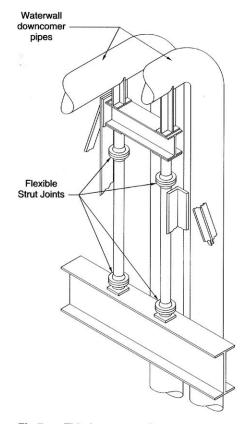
This is a supporting arrangement for boiler water wall downcomer pipes in a large steam generating station. Two Flexible Strut Joints are used as compression members. They eliminate the need for overhead hanger steel which would cantilever beyond the column. Conical action of the strut joints accommodates lateral and axial movement of piping.
